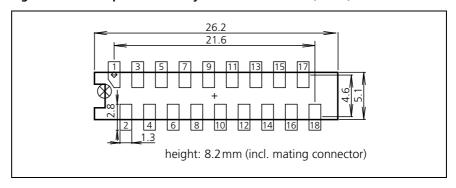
Footprint of 18-way Micro-MaTch socket, SMD, PCB-mount
